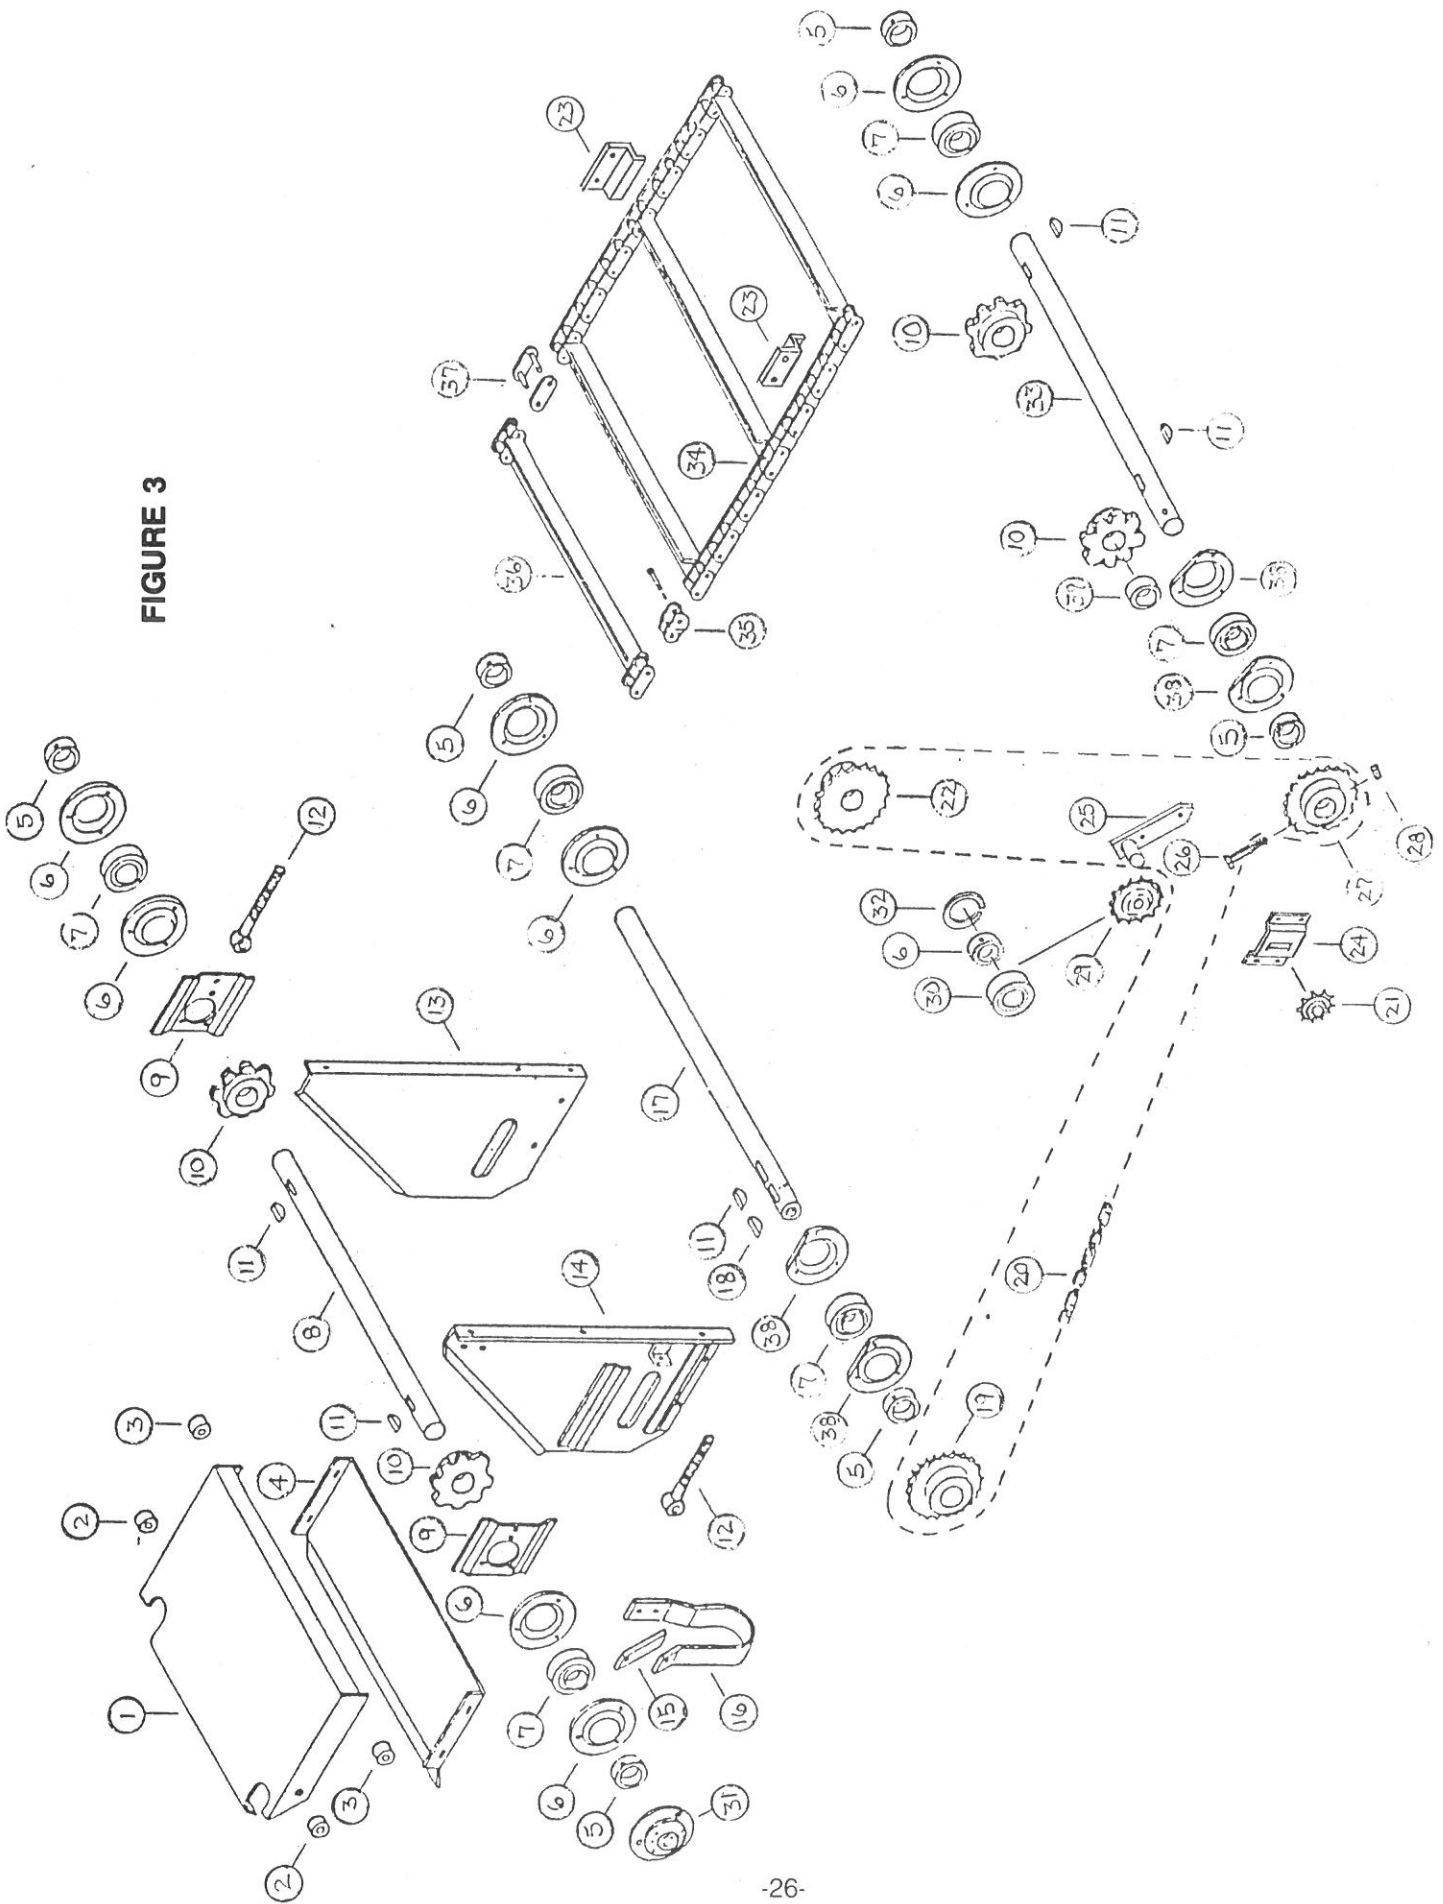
CROSS CONVEYOR AND DRIVE ASSEMBLY
